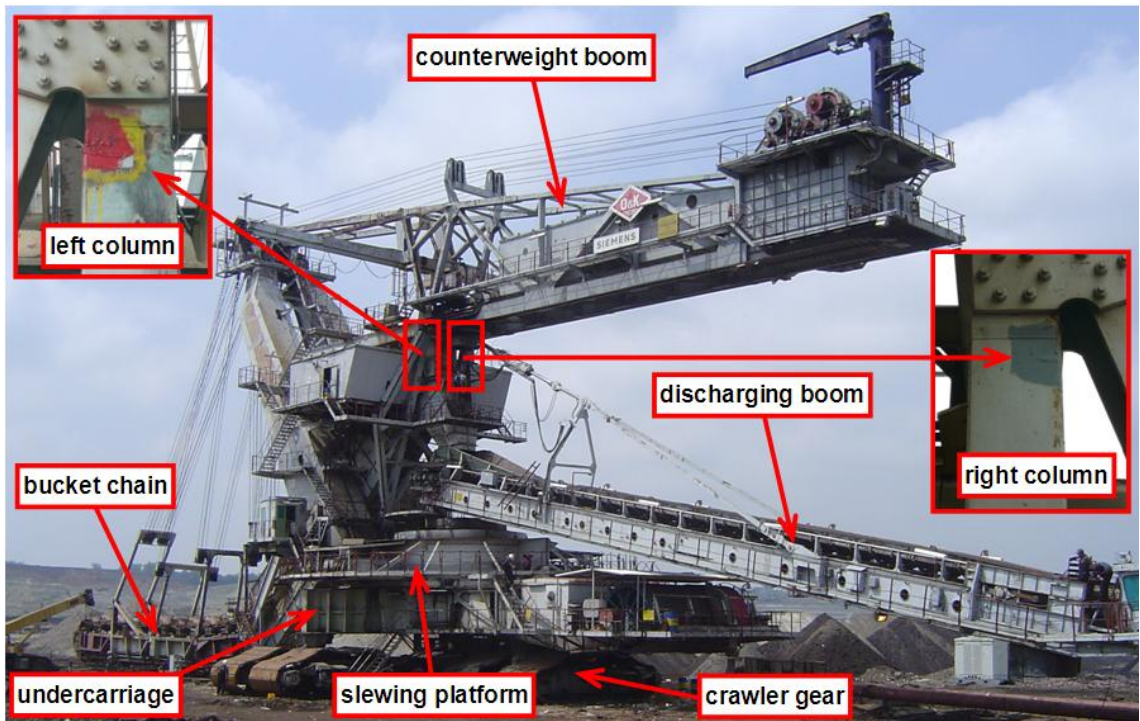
Cracks on the CWB supporting truss columns
